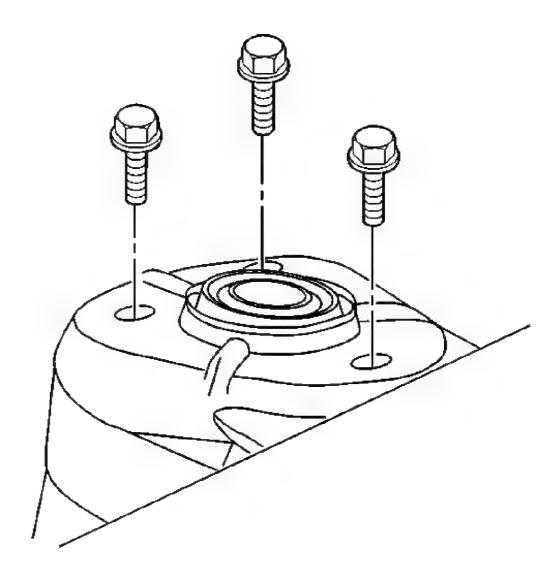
Removing Strut Mount Retaining Bolts Courtesy of GENERAL MOTORS CORP.
